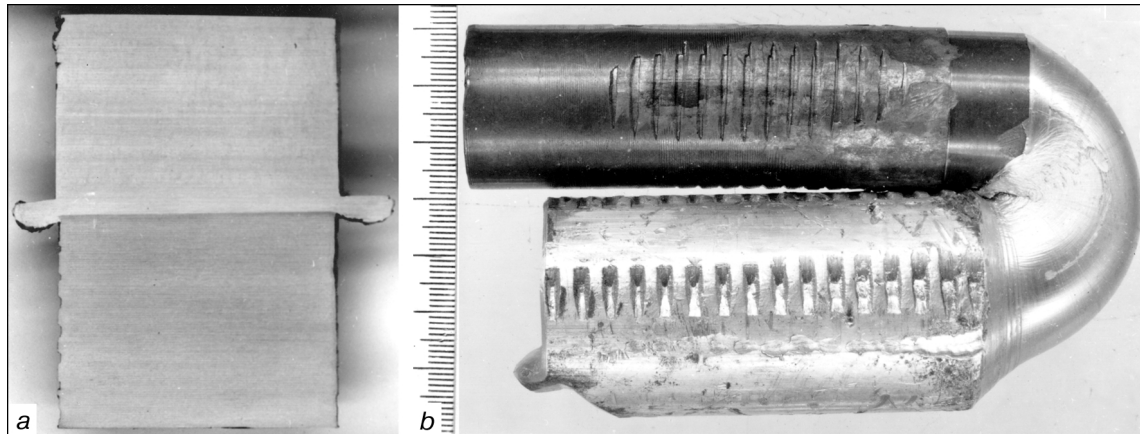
Joints produced by inertia friction welding: *a* — as-welded; *b* — after mechanical tests
